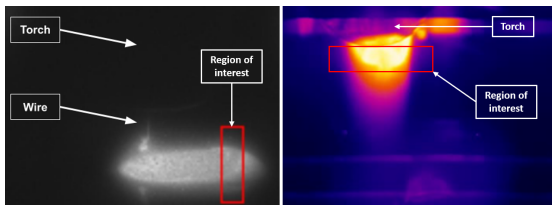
Thermal images:(Left) Side view to measure layer height. (Right) Top view to measure weld pool width.
